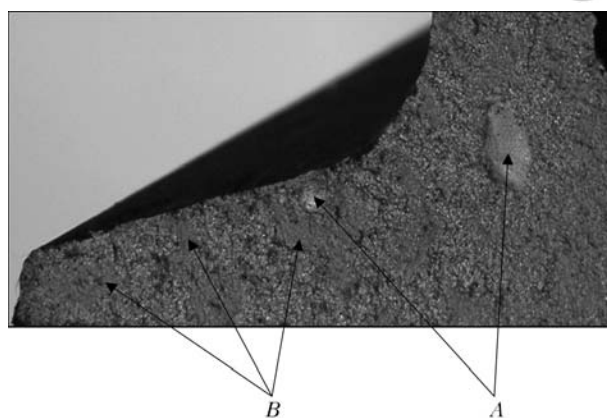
Fragment of fracture of welded joint of rails of steel E76F: defects of group A – oxide films; B – DS
